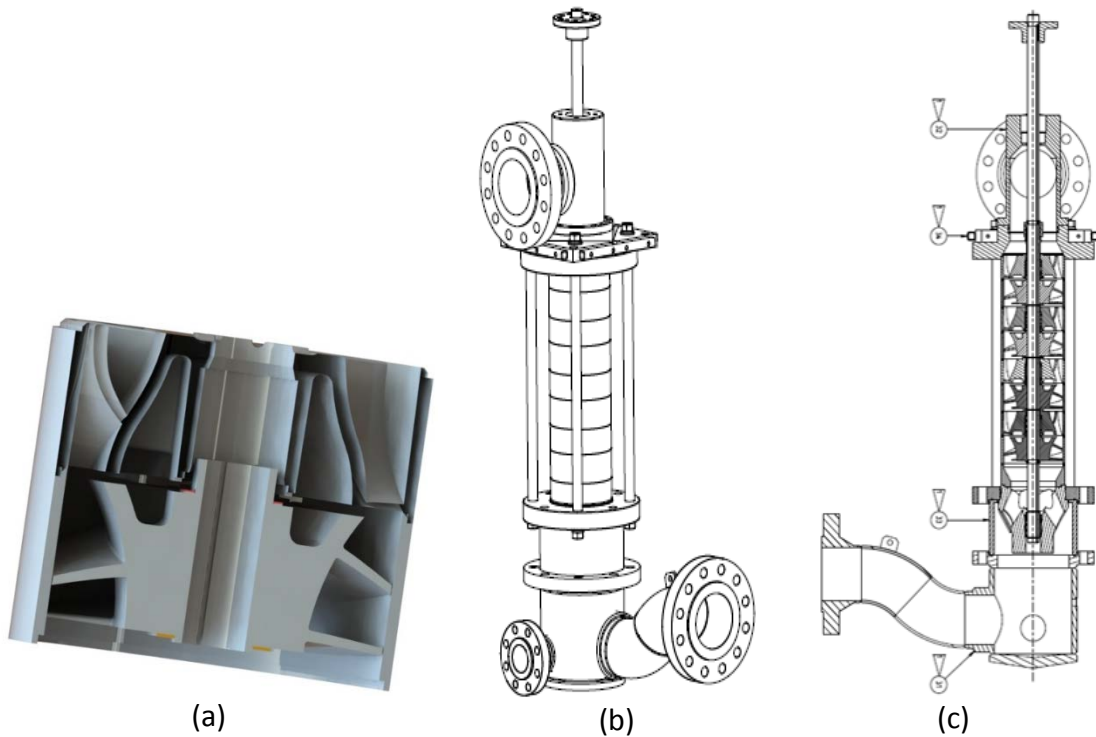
a. Single Stage pump b. 4-Stage Pump Assembly c. Cross Sectional View of 4-Stage Pump
